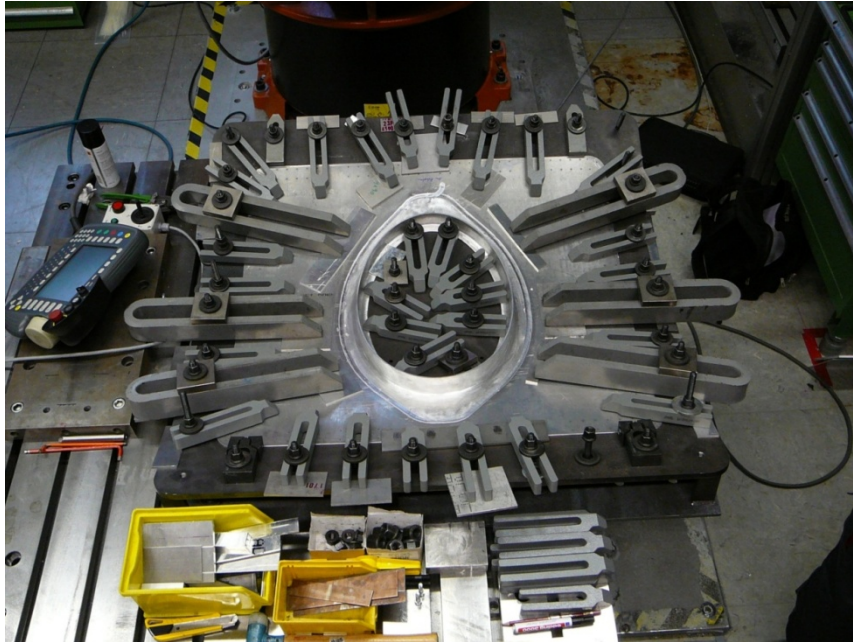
Window-Frame welded to skin – the endhole is positioned outside the circular weld path lines in the skin area
